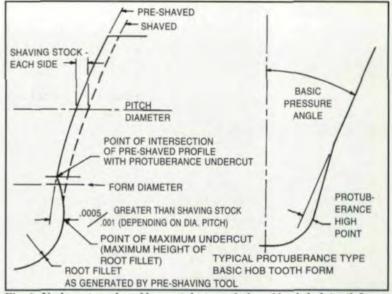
Undercut produced by protuberance hob and basic hob tooth form. Table II - Recommended Shaving Stock and Undercut For Pre-shaved Gears
